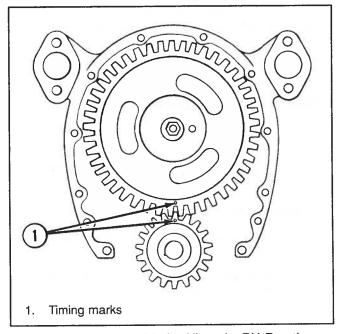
Timing Marks Aligned – RH-Rotation Engines
